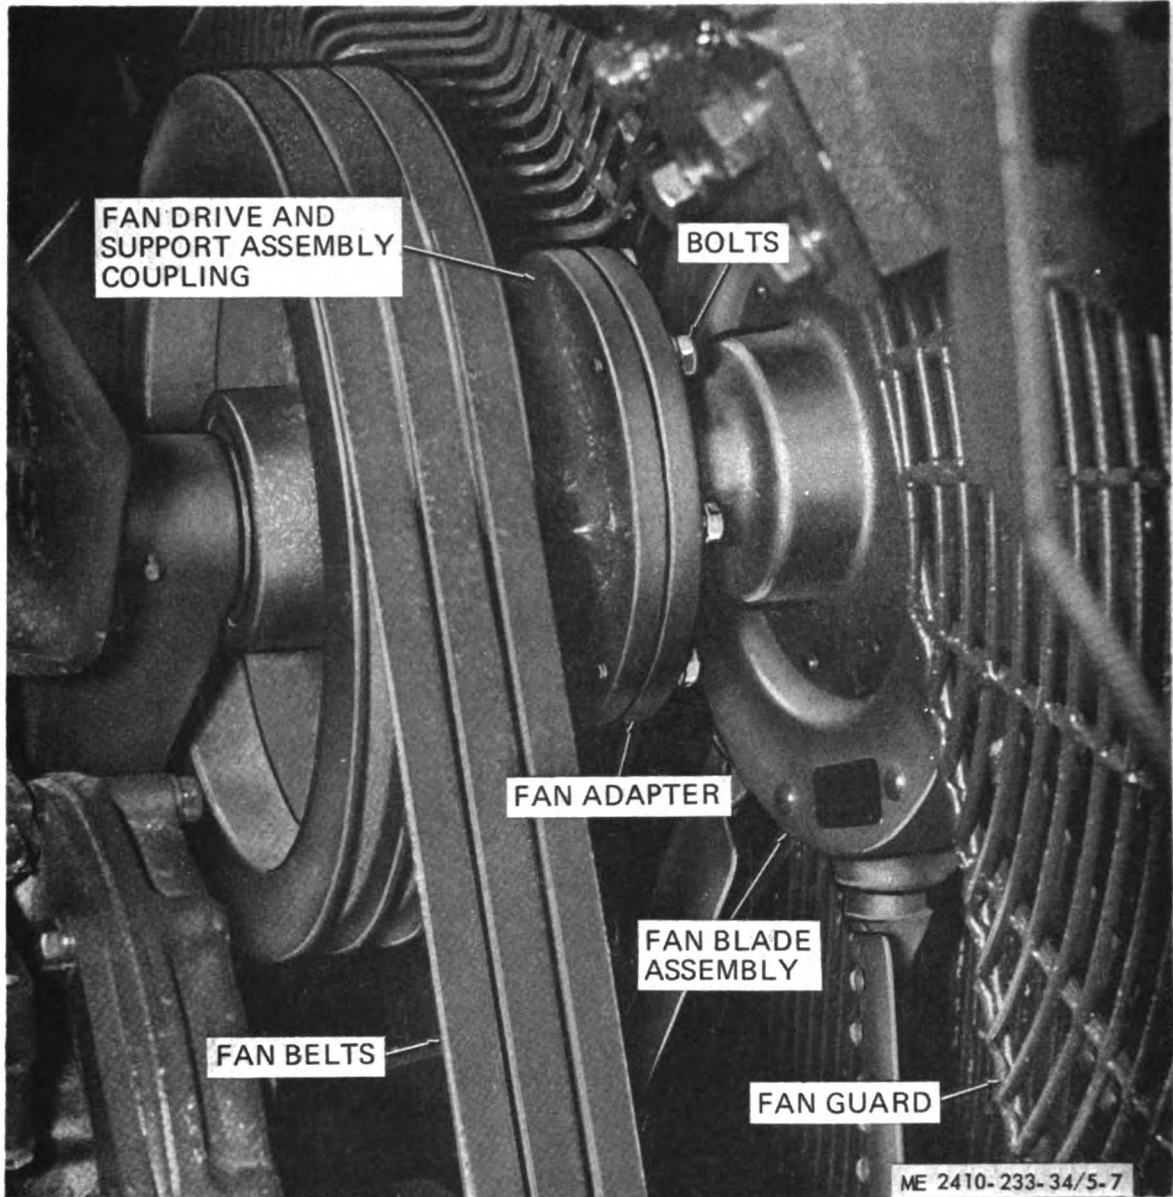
Fan adapter and fan drive and support assembly coupling.
